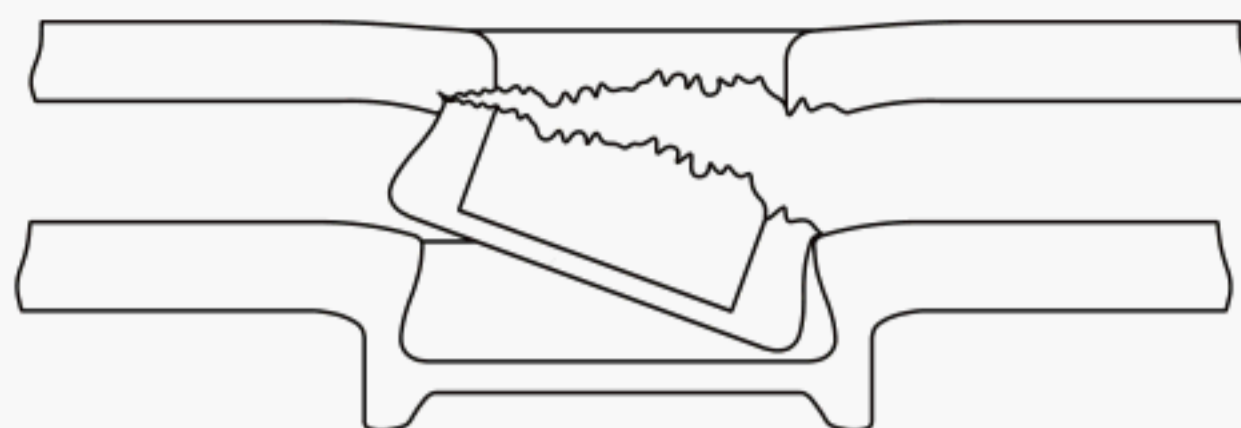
Typical failure modes of solid self-piercing rivet joints under cross-tension load
